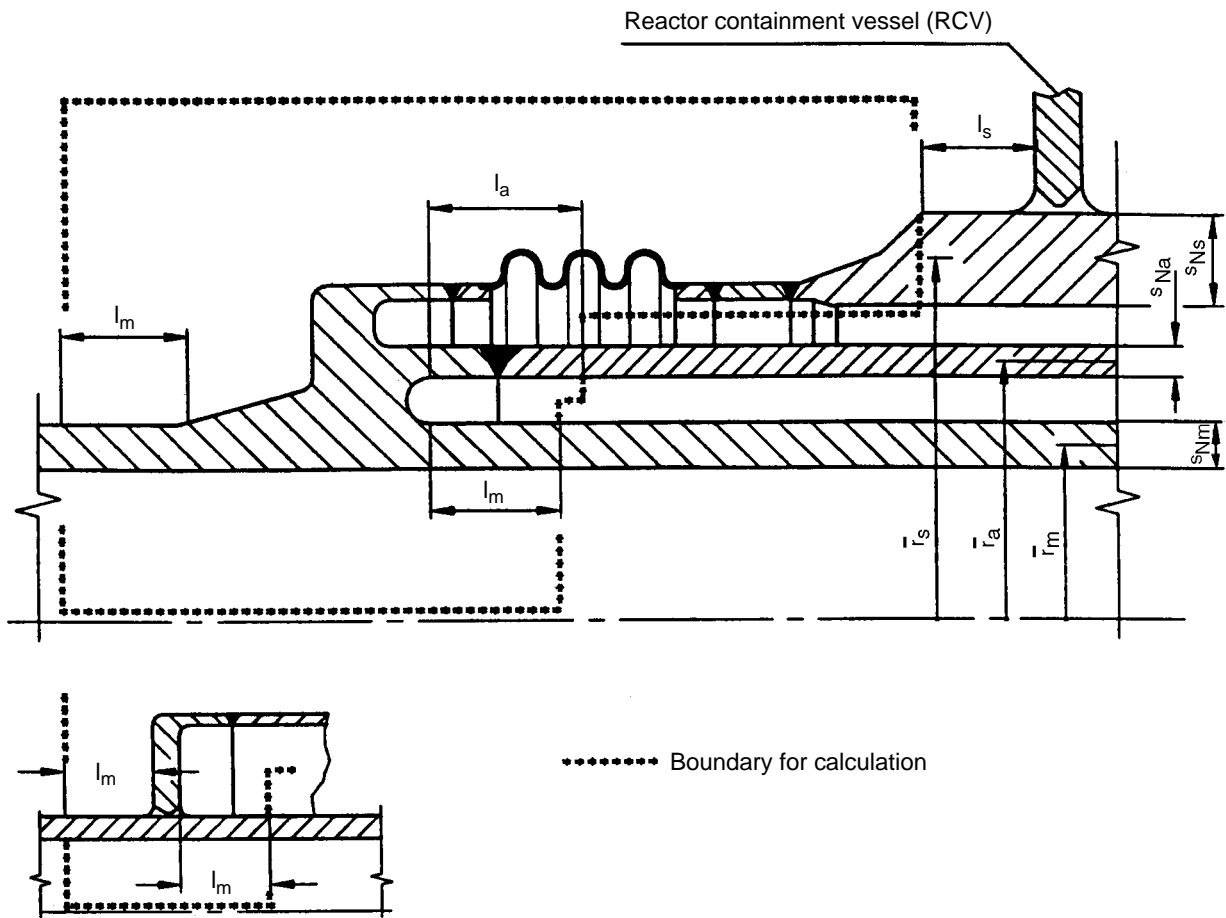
Example of pipe penetration of design type IV with integral anchor point and identification of design loading levels R1, R2 and R3
